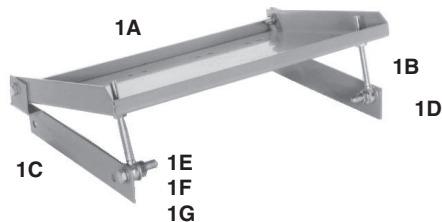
Motor Mounting Plate Assembly (Refer to [Table 15](#))
